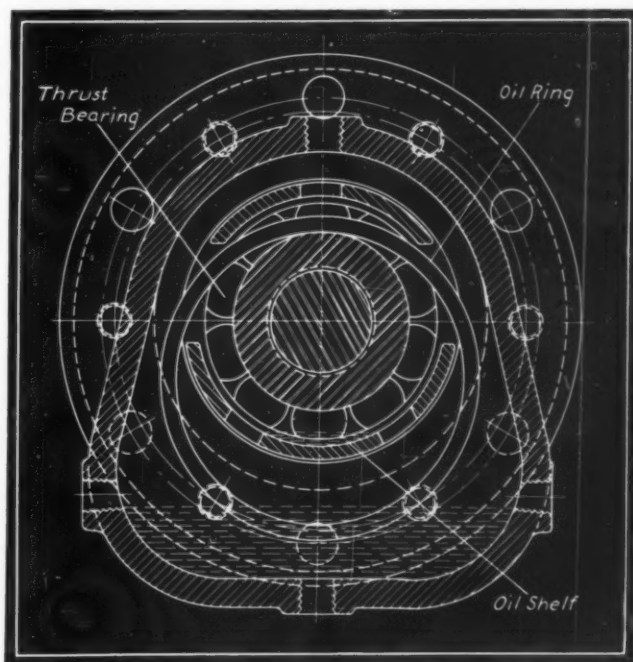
Thrust bearing of the ball type employed on centrifugal hot oil pump incorporates an oil ring that carries oil to a shelf by which the proper level is maintained. Excess oil returns to the reservoir below
